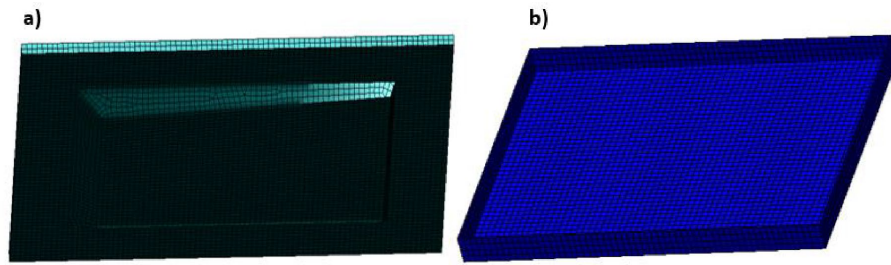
CAD tools in PAM-FORM environment: a) upper mold; b) lower mold.
